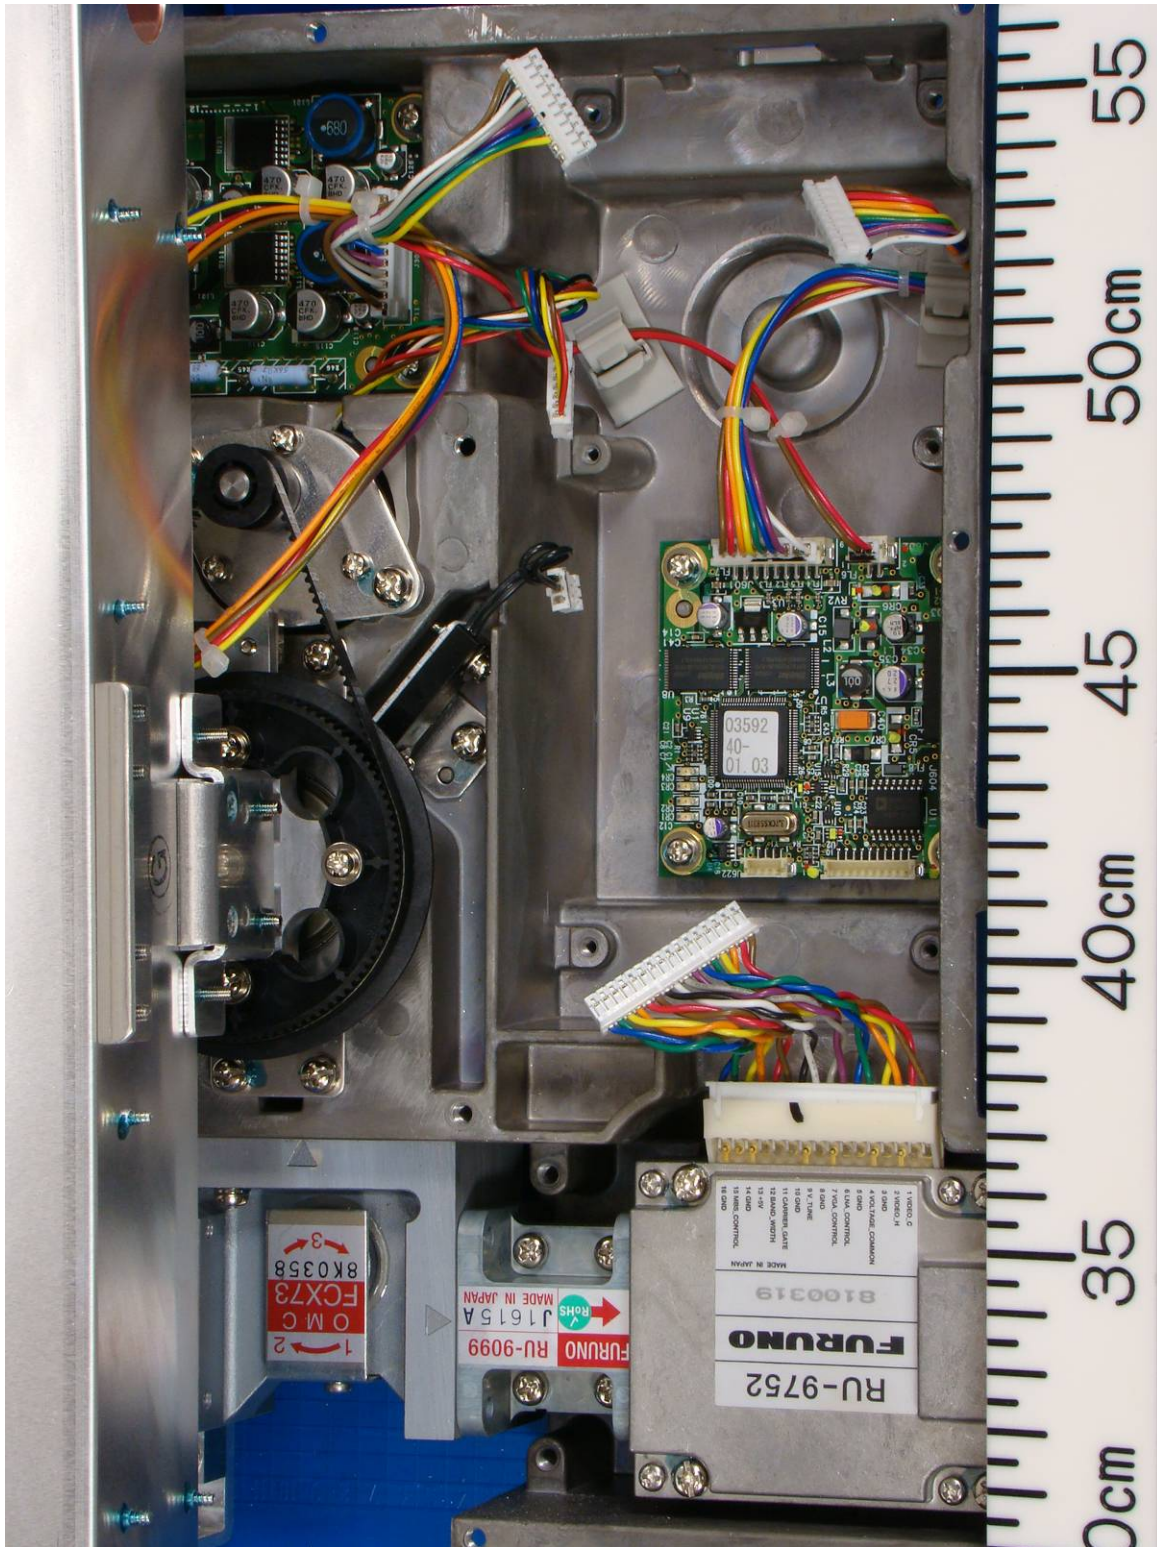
Transceiver top view with Shield-cover and SPU Board removed, showing RXM module RU-9752 (lower left) and NMEA2000 Board 03P9462 (center)
